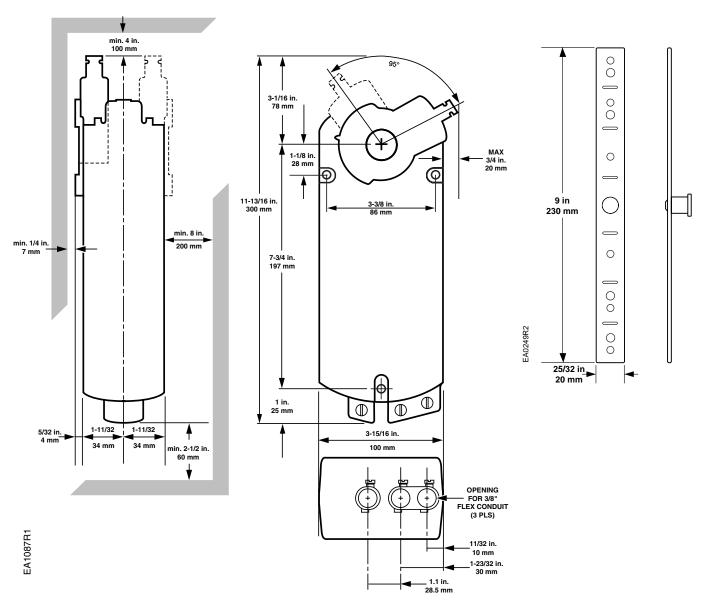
Dimensions of the GCA Actuator and Mounting Bracket.
